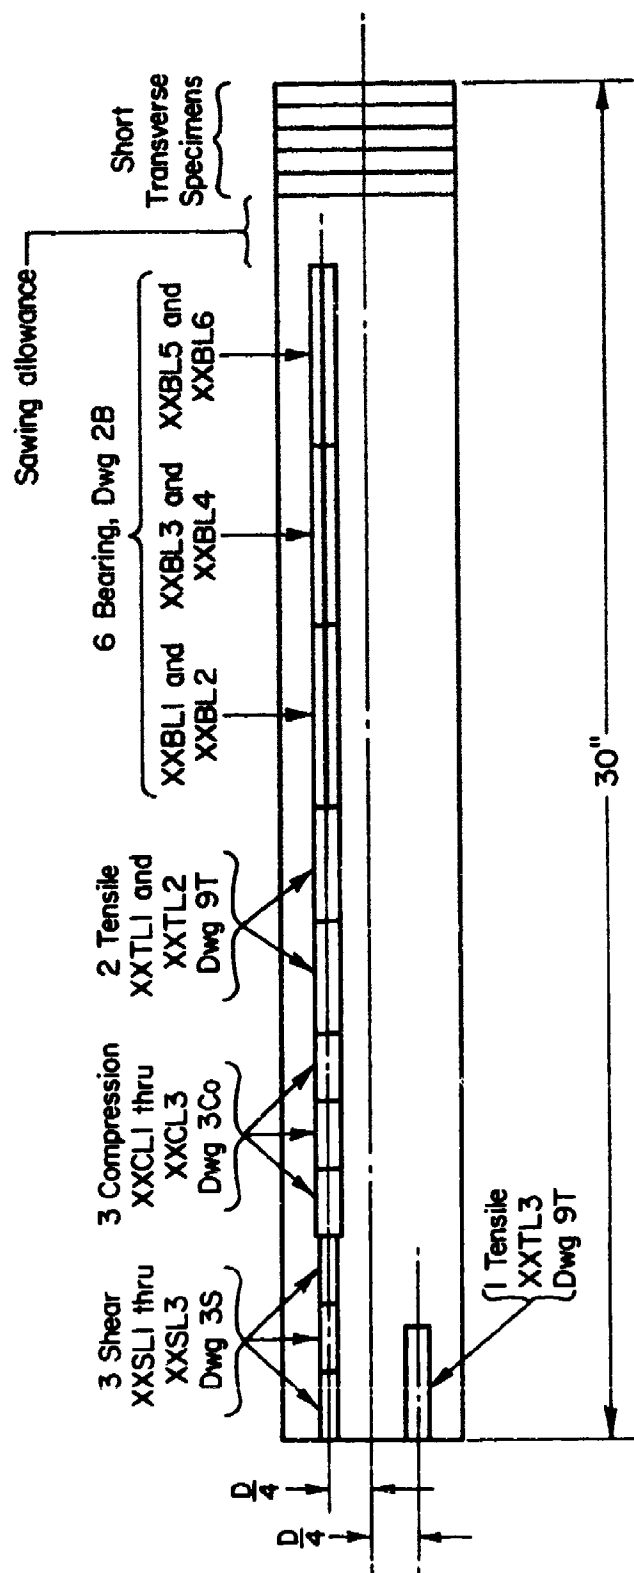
Plan view showing location of specimens for Inconel 625 and Inconel 718 bar.
